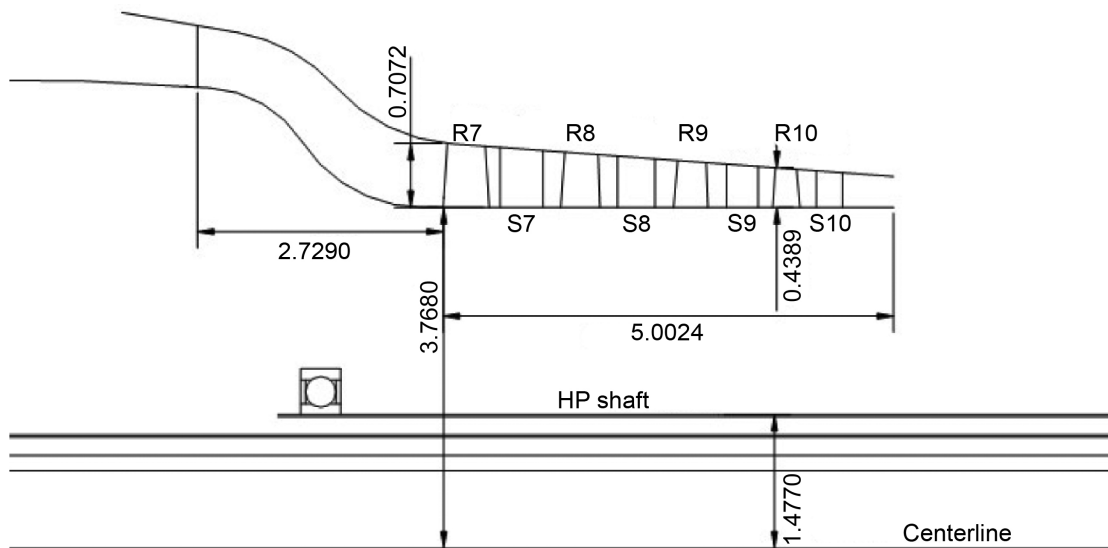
Flow path for the four-stage axial high-pressure (HP) compressor of the Large Civil Transport Rotor Engine, option 1 (Ref. 12).
